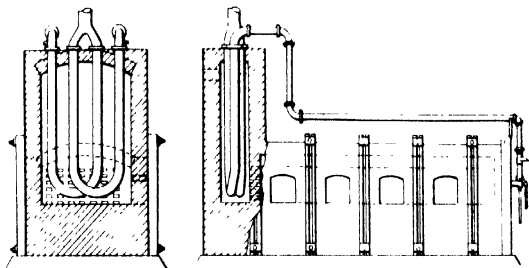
RECUPERATOR TUBES ON OIL FIRED FORGING FURNACE
